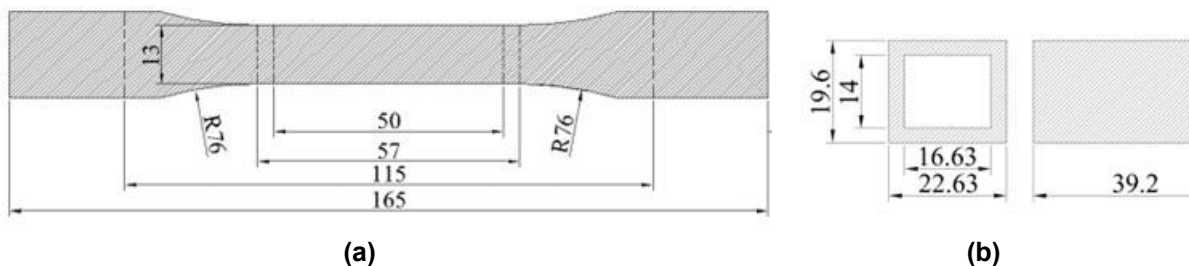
Specimens for material properties testing in mm (a) Tensile test and (b) Compressive test
